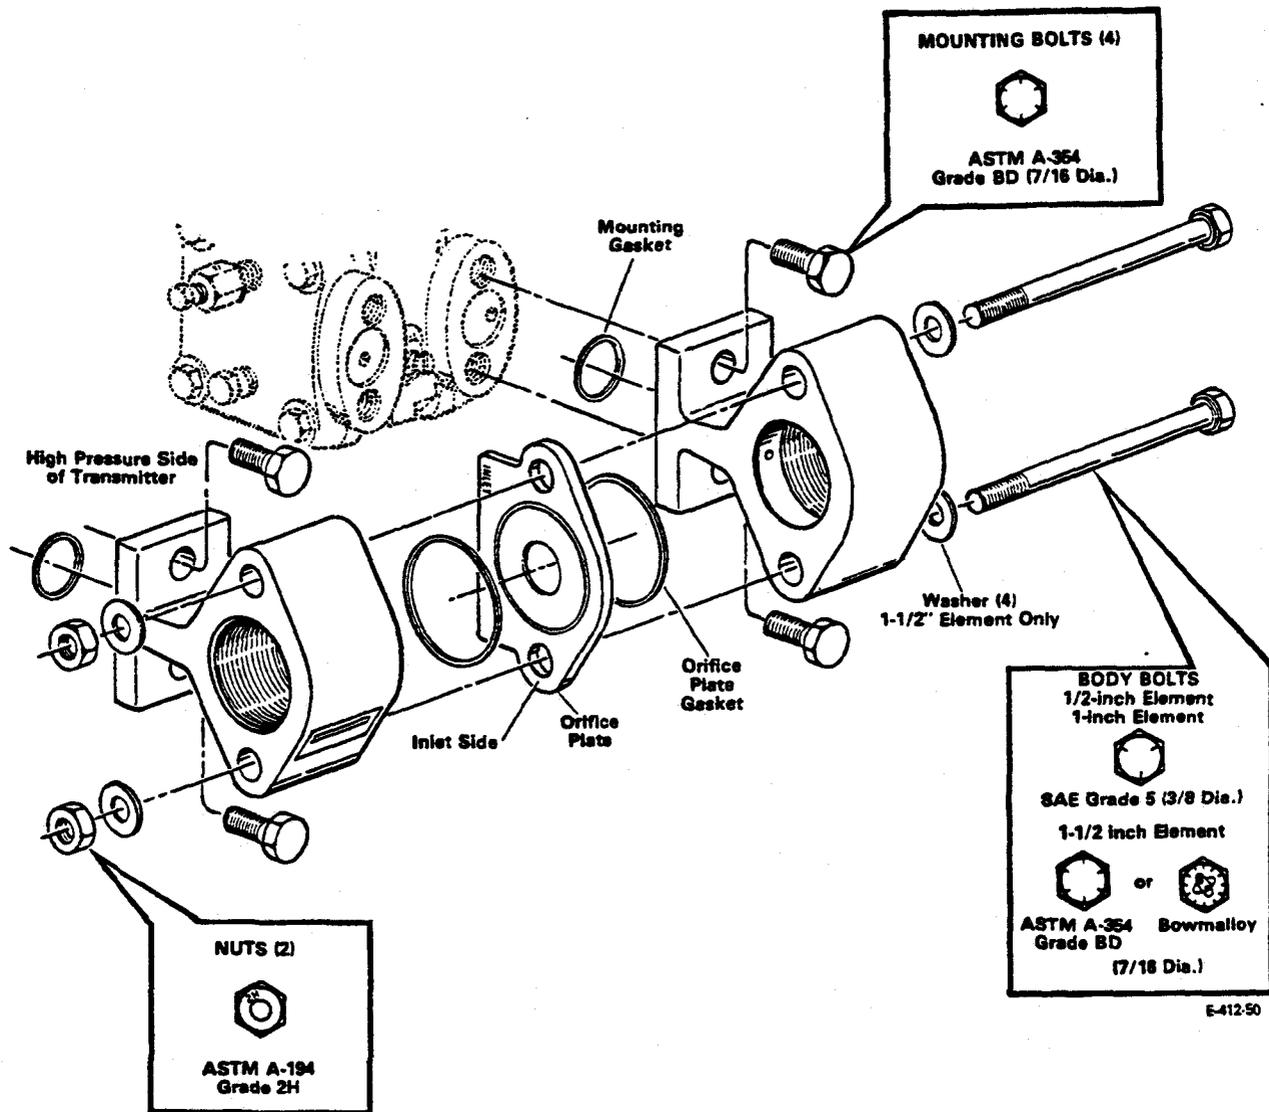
Exploded View of Flow Element With Threaded Connections
